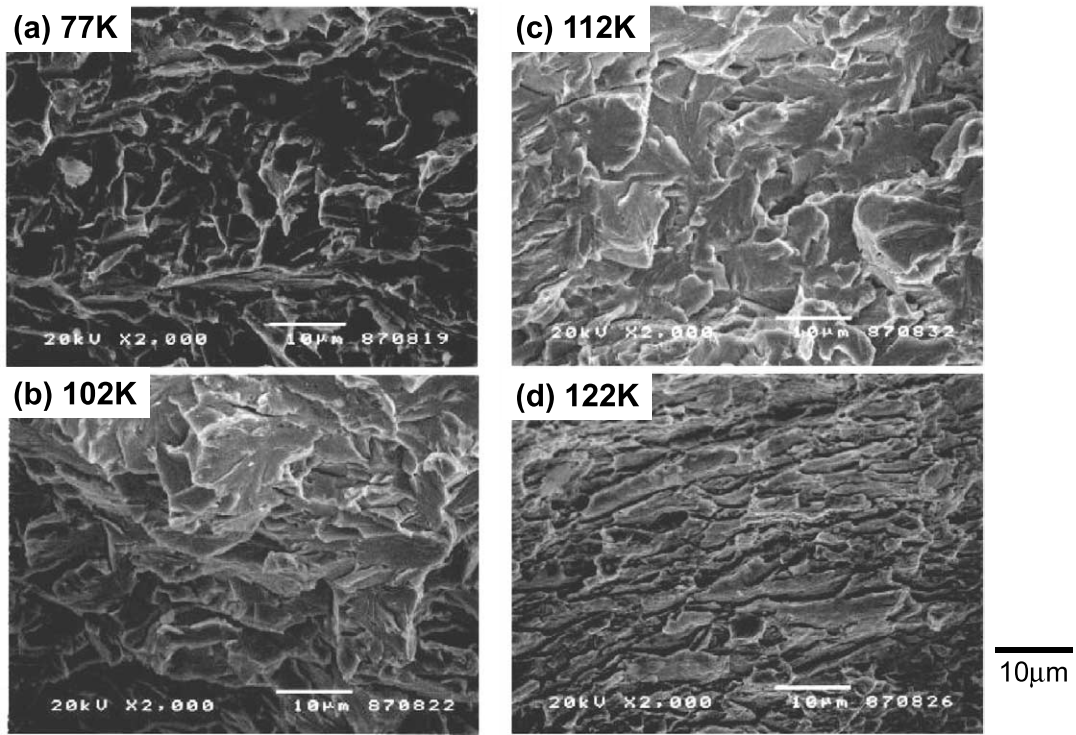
Fracture surfaces of 580 at. ppm He-implanted specimens after SP tests at (a) 77 K, (b) 102 K, (c) 112 K and (d) 122 K. Specimens after SP tests above 122 K showed ductile failure.
